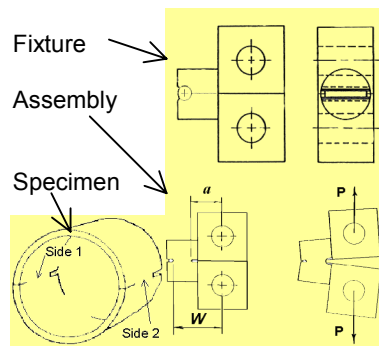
Schematic of the PLT specimen, fixture, and specimen-fixture assembly.
